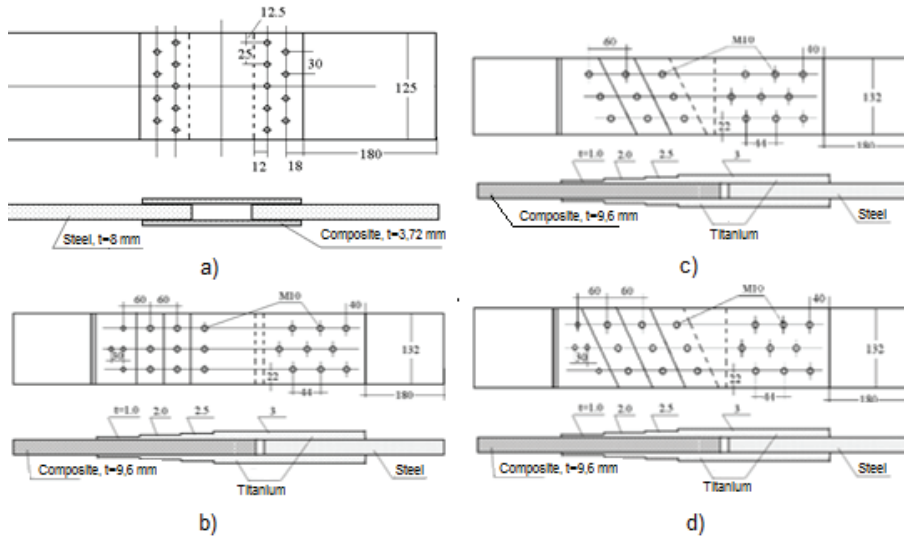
Specimens layout: a) O1, b) O2, c) O3, d) O4.
